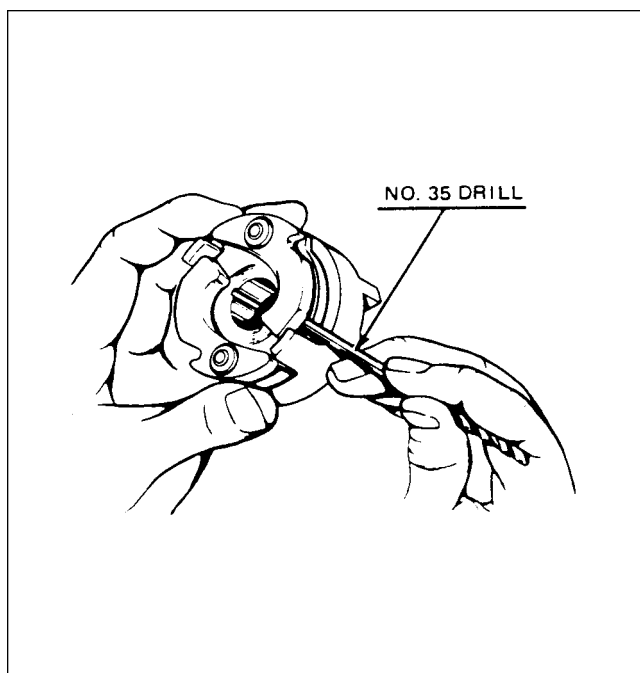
Checking Flyweight Axial Wear with Drill Shank
